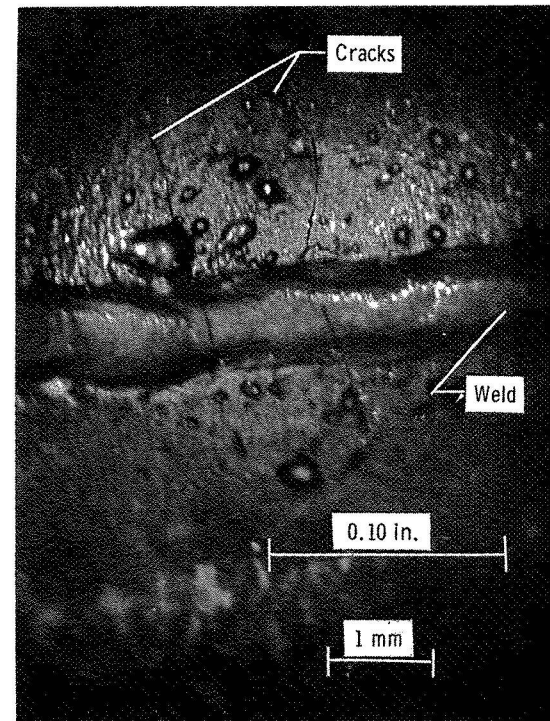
Close-up view of weld bead of ball from figure 7(b) showing cracks on internal surface, across weld.
